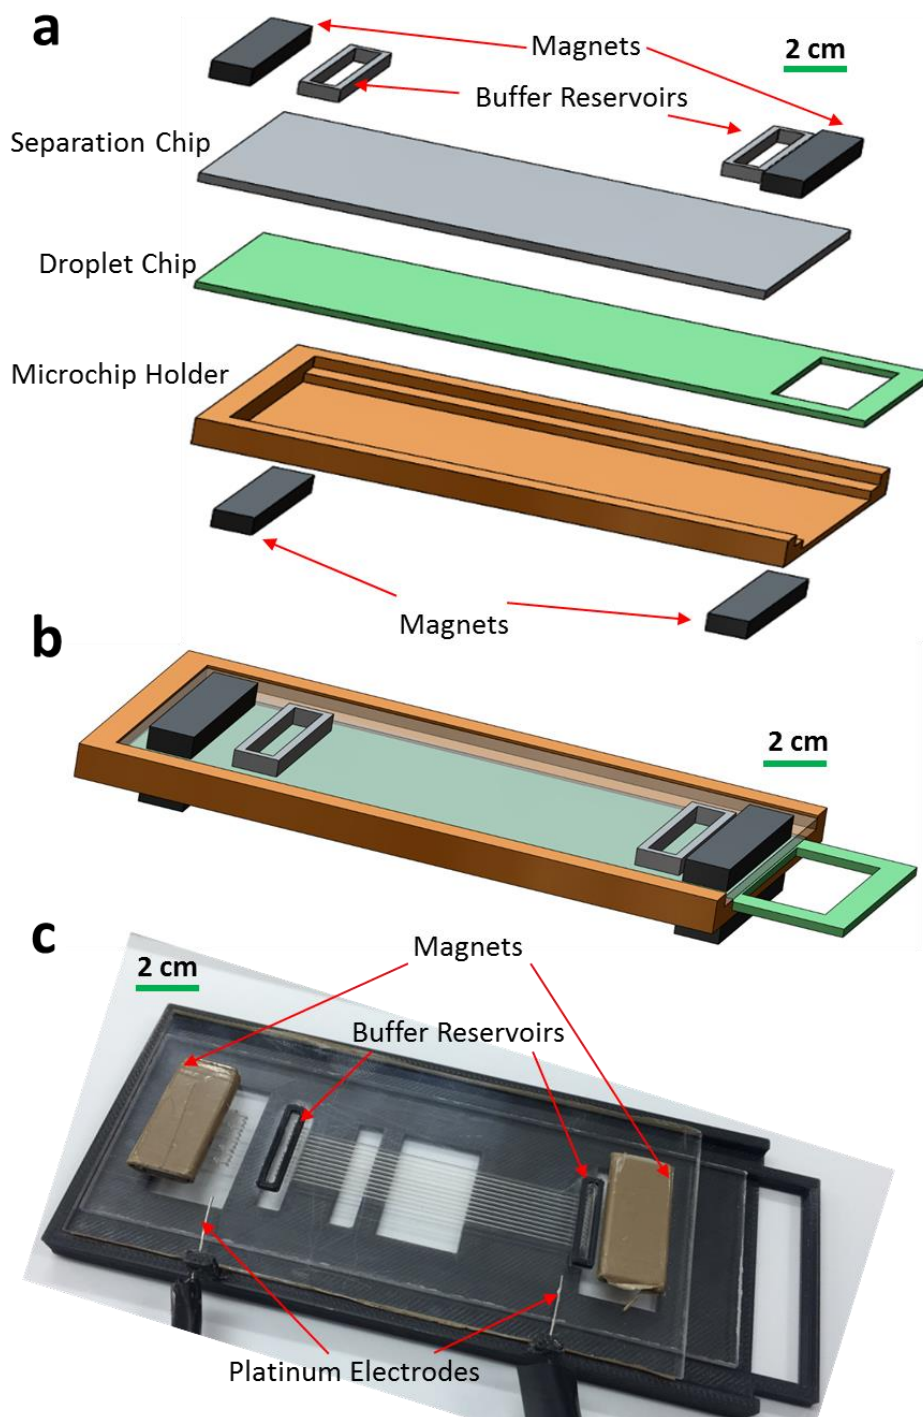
3D Schematic of the 3D printed Slipchip holding platform a) Illustration of different layers of platform before assembly showing microchip holder, and separation and droplet plates in place for MCE separations, b) 3D schematic of the fully assembled platform including separation and droplet plates, magnets, and buffer reservoirs, c) Snapshot of the fully assembled platform.
